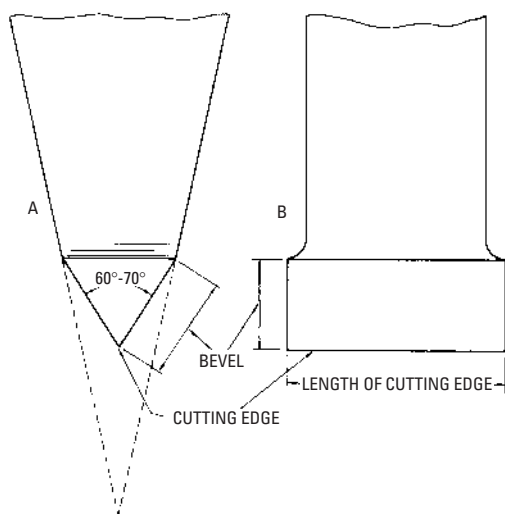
Cutting end of cold chisel showing bevel angle (A) and length of cutting edge (B).
